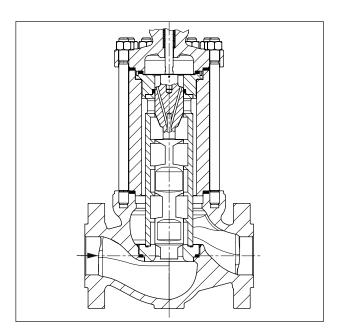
Type 261GR Globe Valve with 6-stage CDST plug and pressure balancing
